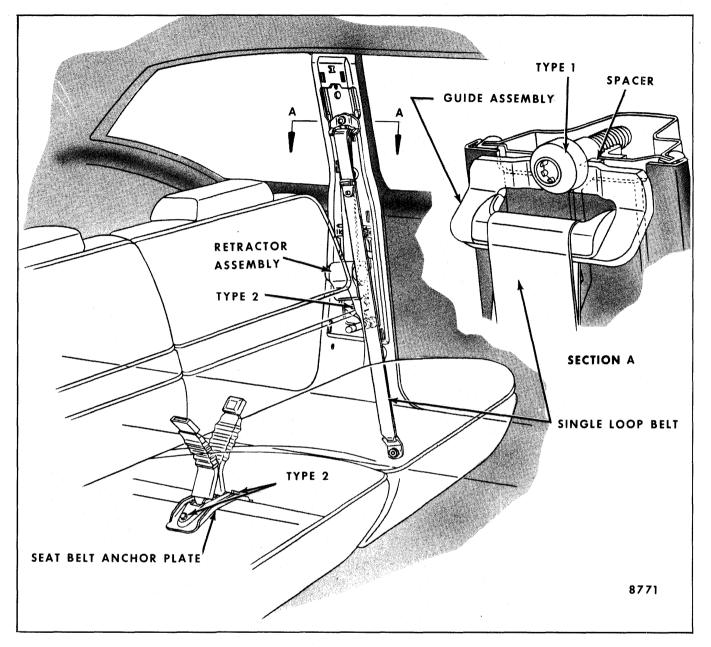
Front Seat Belt, Guide and Buckle Assembly Installation
